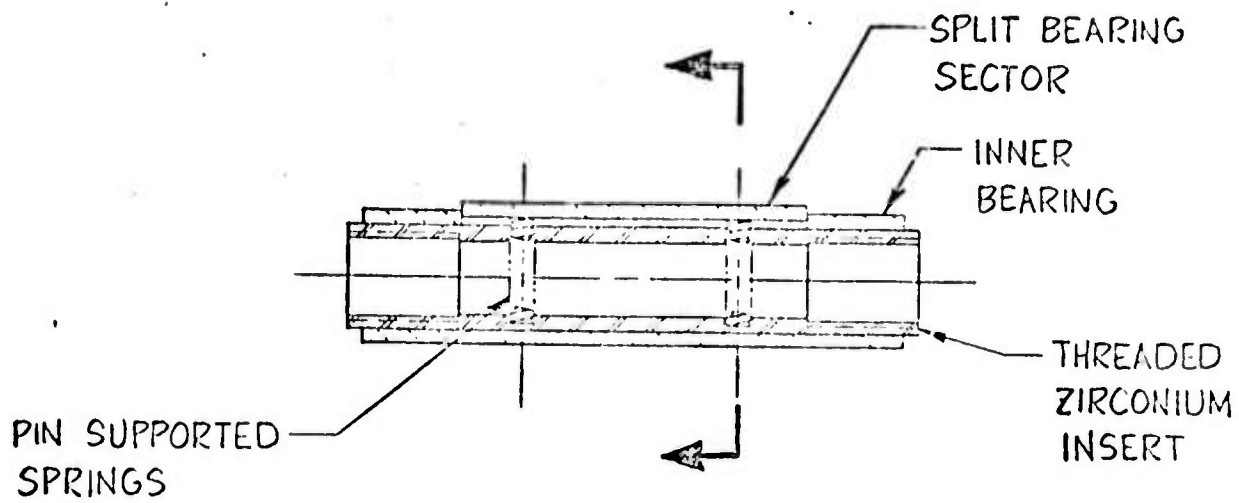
ASSEMBLED BEARING IN MAGNET POLE PIECE
